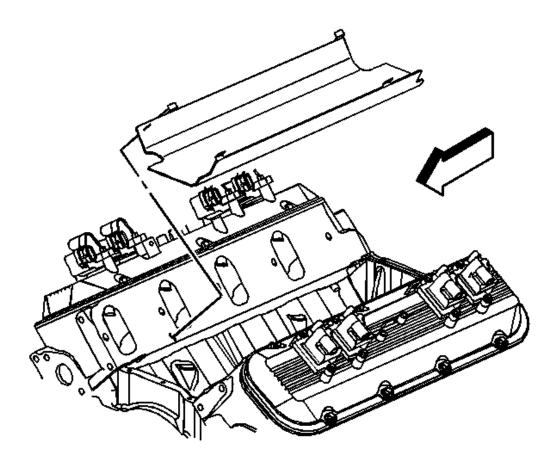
View Of Splash Shield Courtesy of GENERAL MOTORS CORP.
